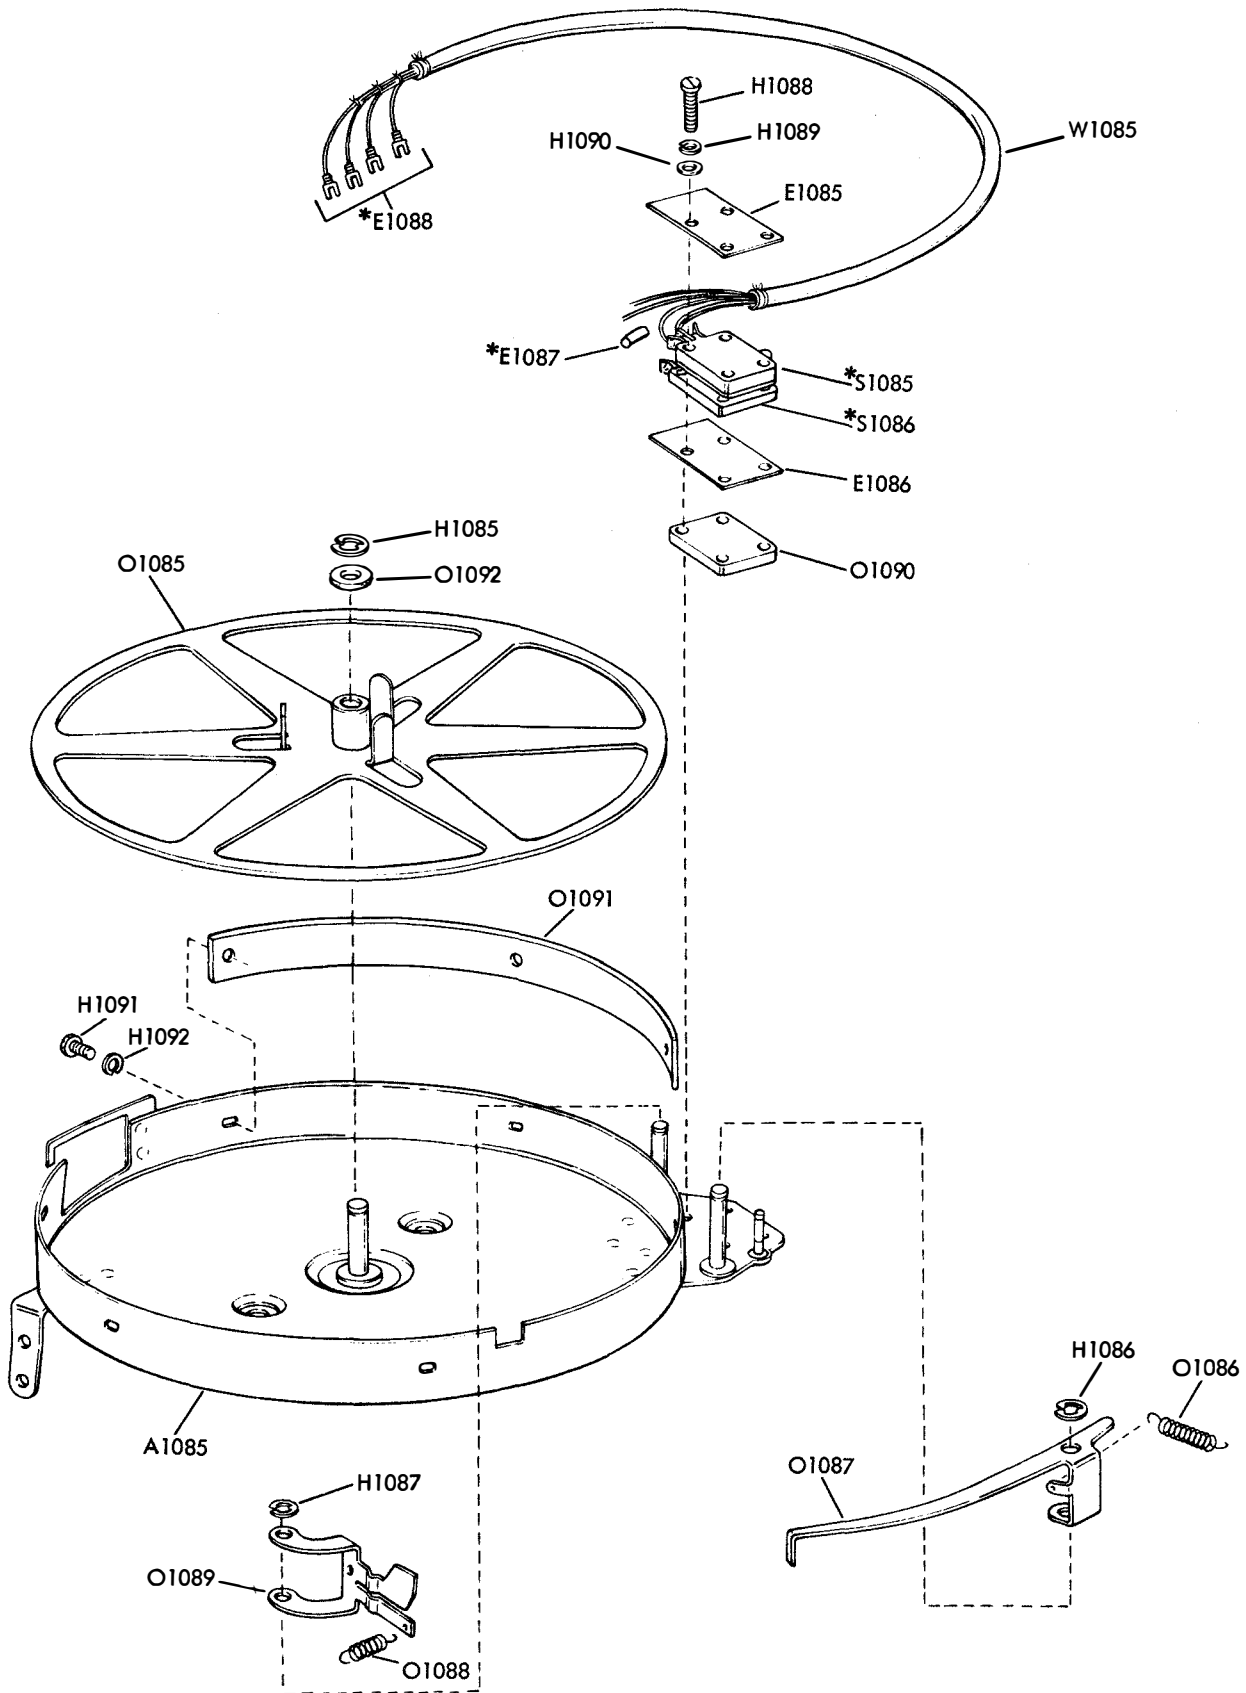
Tape Container Assembly (TT-192A/UG)
